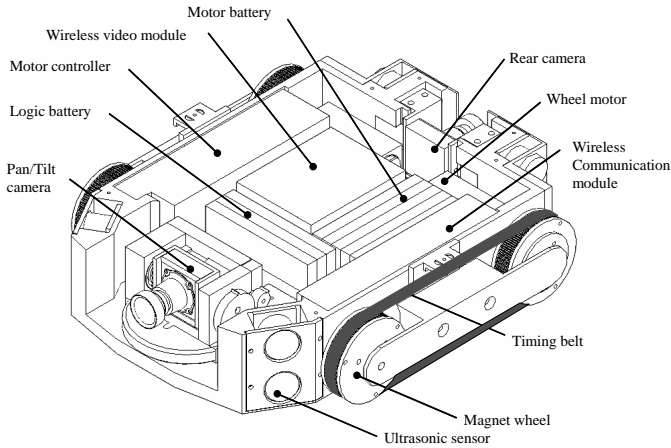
A Schematic of the RPV head visual inspection robot.
